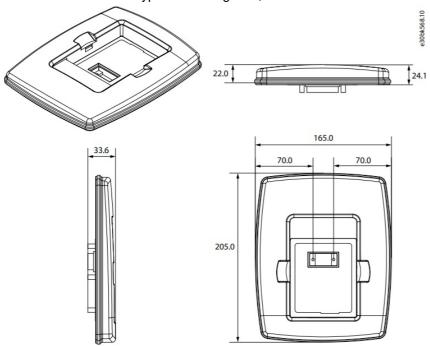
Door Keypad Mounting Unit, Dimensions in mm
